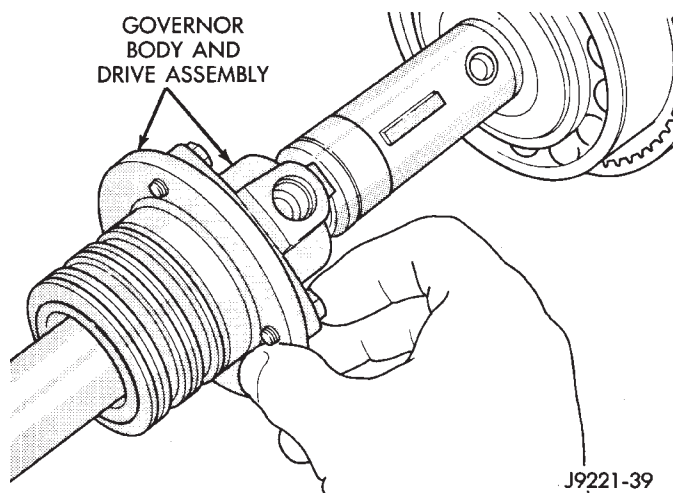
Governor Valve And Shaft Removal/Installation
